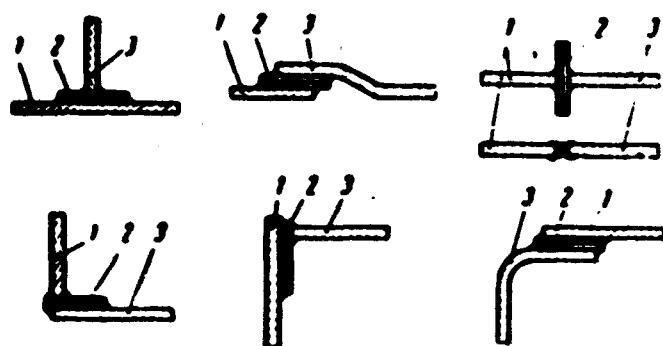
Scheme for welding steel-aluminum units through intermediate bimetallic inserts [90]:
